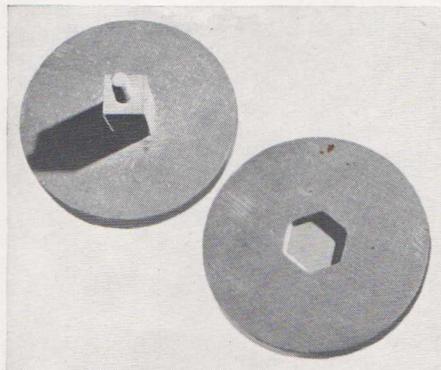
The upper ferroxcube disc shows a square cutter placed in the hole previously machined and the shape in the lower sample was produced by using a hexagonal headed bolt as the cutting tool. These are typical of machining operations readily performed in ceramics in their fired state.
